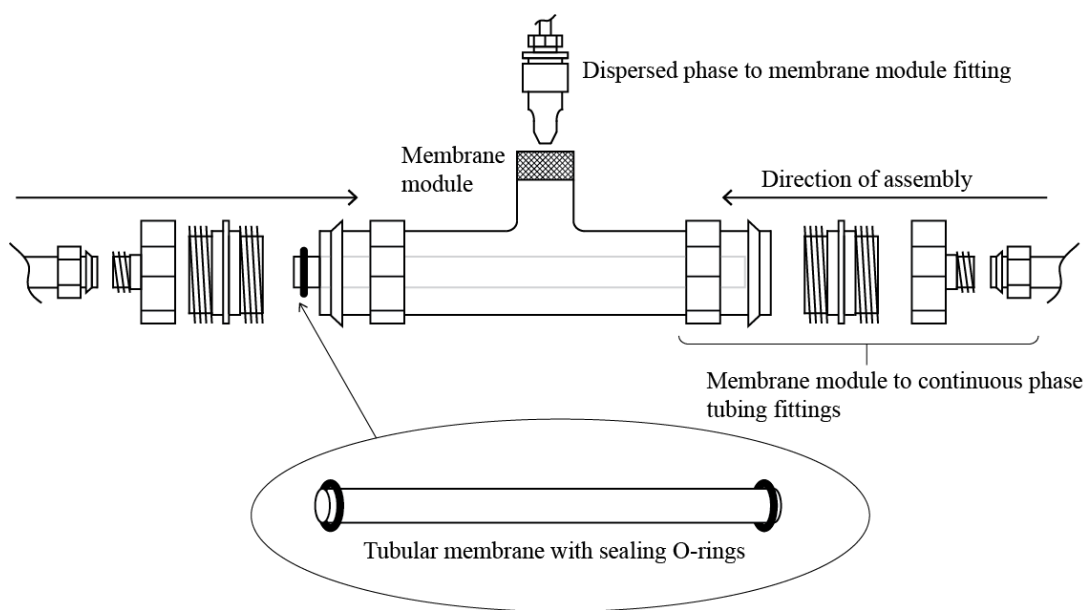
Expanded diagram of membrane module showing key fittings and assembly
